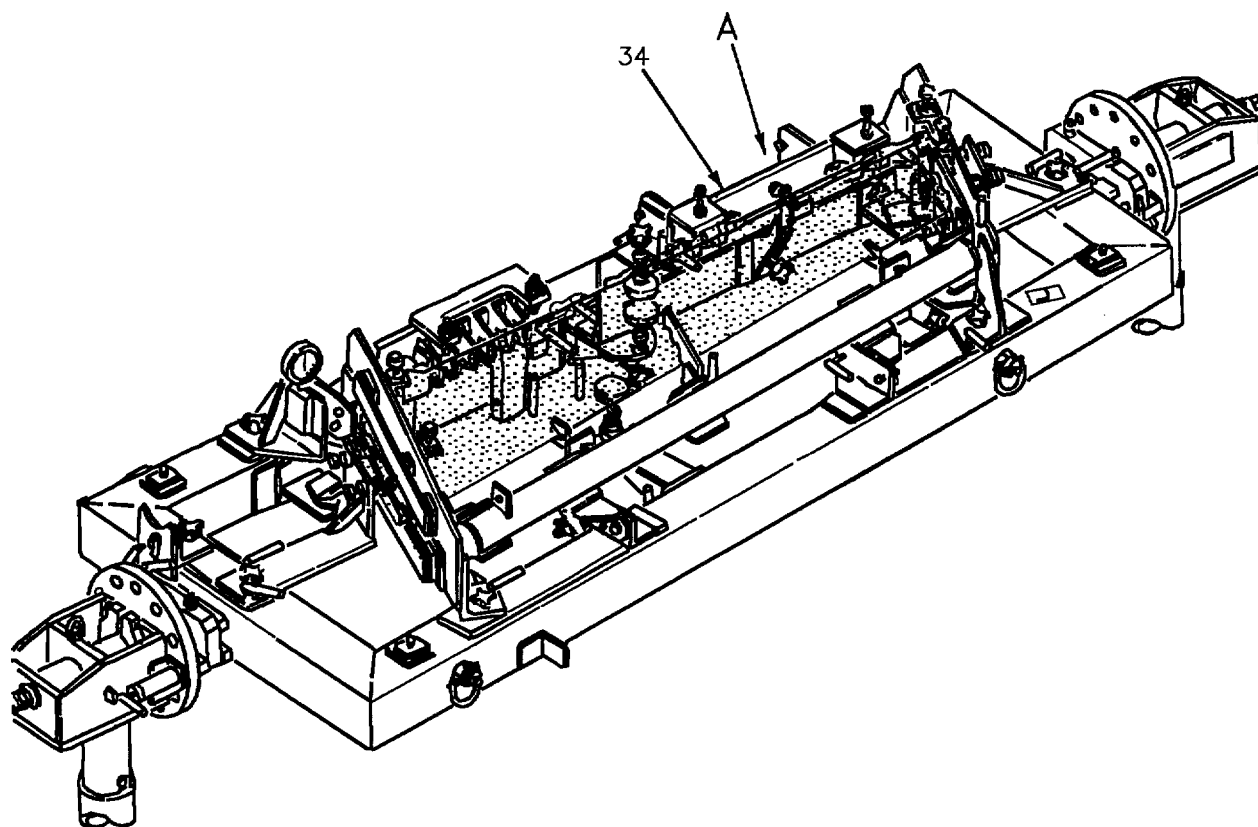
Idler Lug Second Oversize Bushing Installation (Sheet 1)
